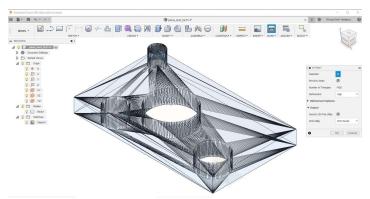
Design of the part use to export in PrintStudio for 3D printing
